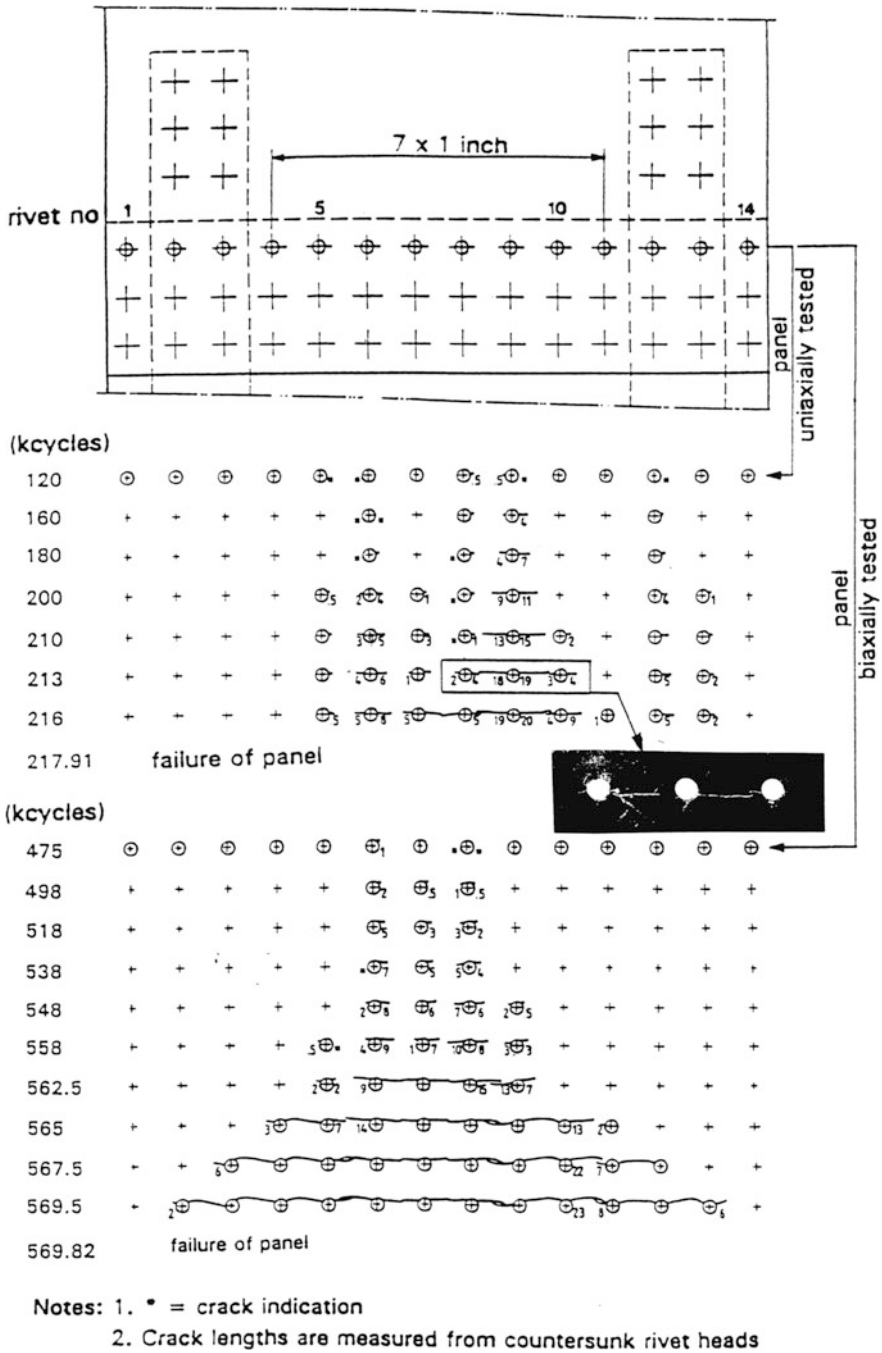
Typical crack initiation and crack propagation in the critical rivet row for uniaxial and biaxial lap joint specimens. Hoop stress of 14 ksi (Vlieger 1994)
